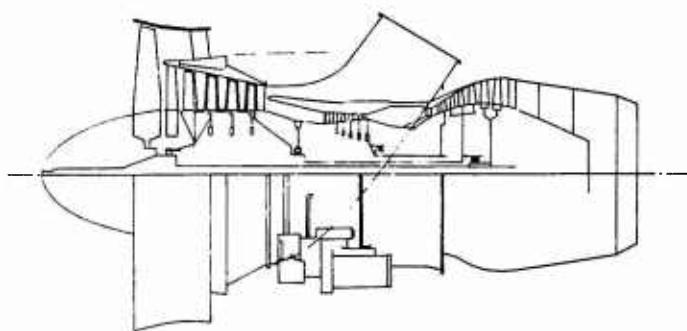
Typical layout of a 3-shaft engine designed for high IP compressor bleeds
